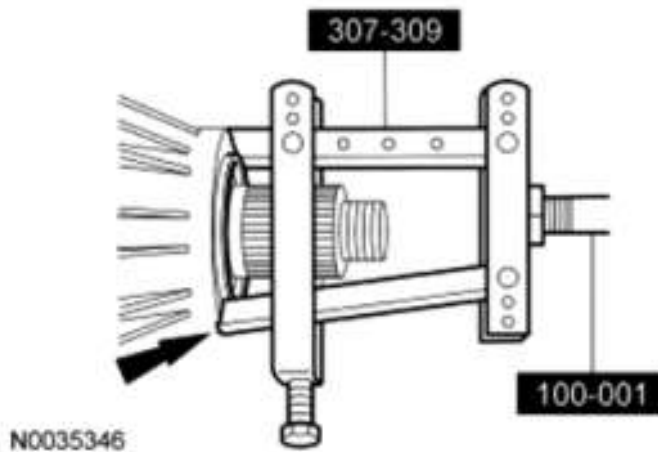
Removing Rear Output Seal Using Slide Hammer With Torque Converter Oil Seal Remover
